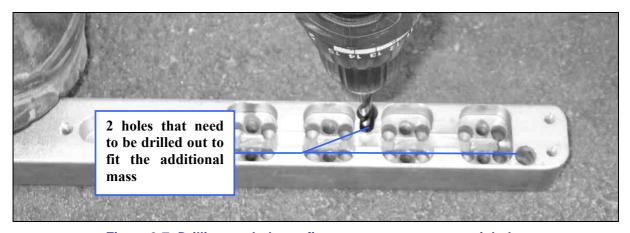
Drilling out holes to fit extra mass to counterweight bar
